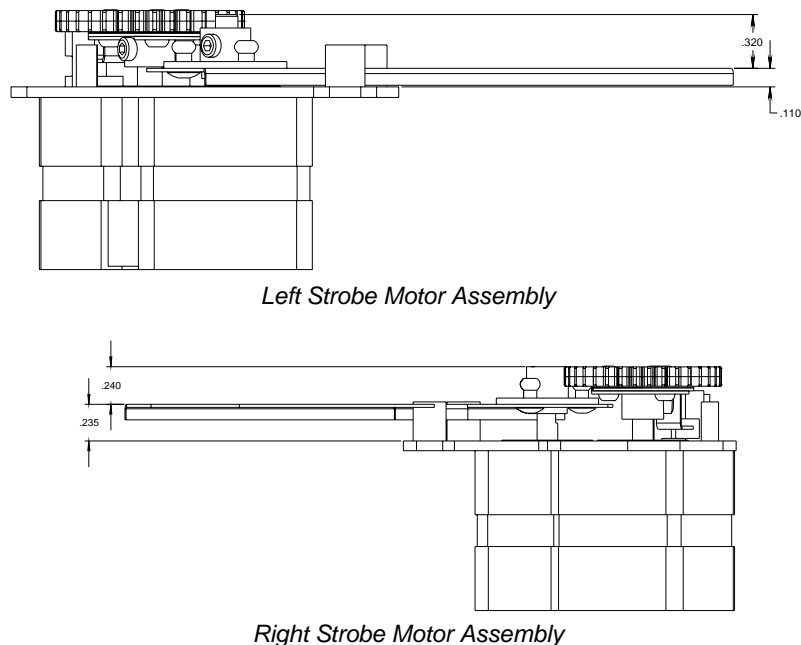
Strobe Assemblies - Strobe Blade Height Settings
